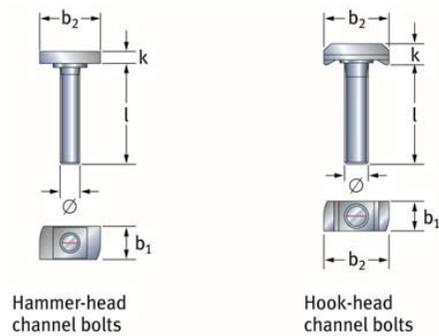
Hammer-head channel T-bolts and hook head channel T-bolts
